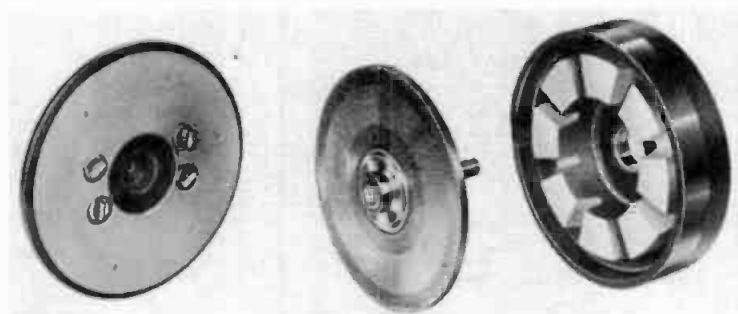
A. Exploded view of a printed-circuit motor. At the left is the housing cover with the brushes, armature, and permanent-magnet stator. (Courtesy, Printed Motors, Inc.)
